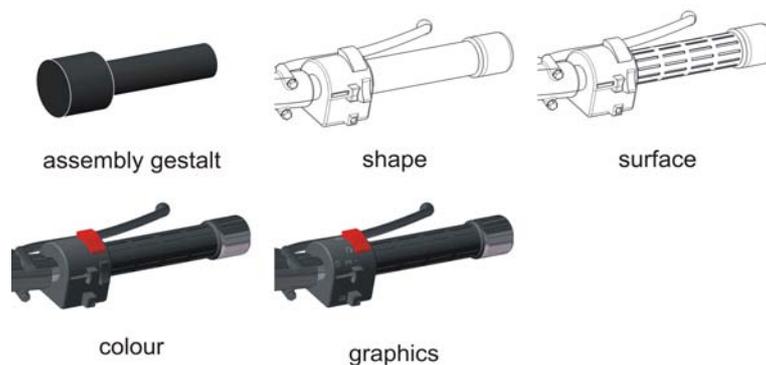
Assembly gestalt, shape, surface, colour and graphics of a motorbike hand grip
